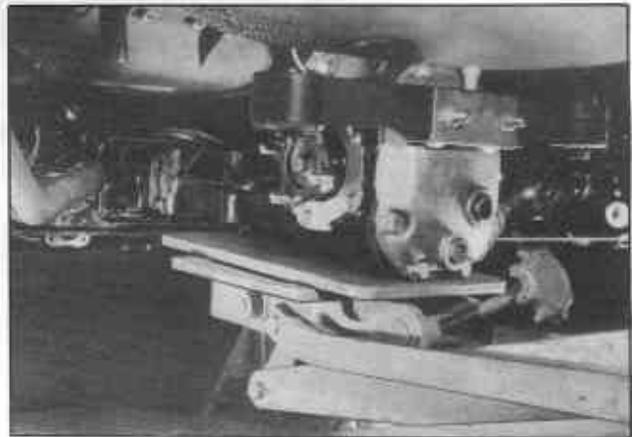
Removing hand brake rear cable, propeller shaft and drive shaft
